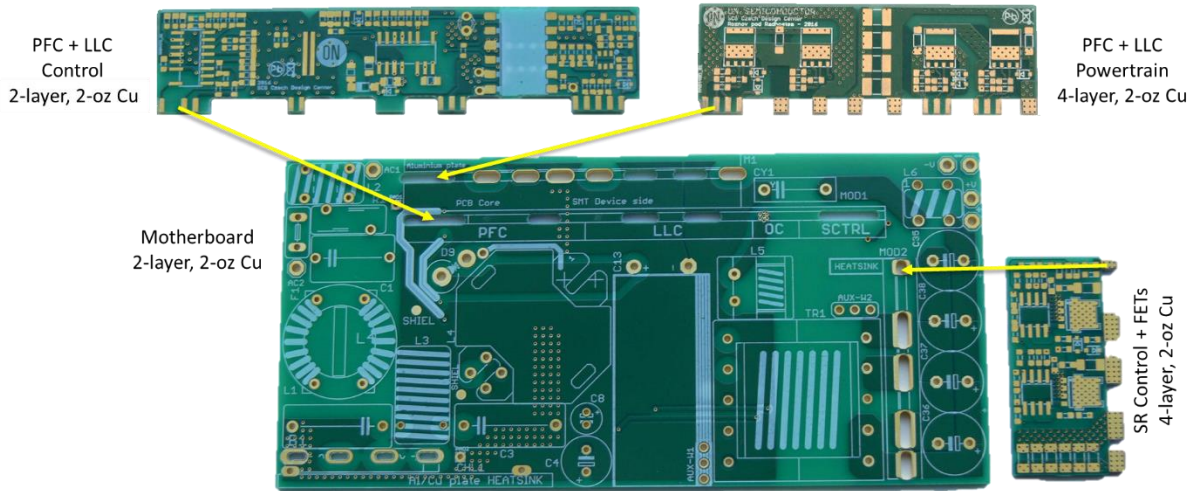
Power board and daughtercard PCBs (generic construction shown, actual board design may vary)
